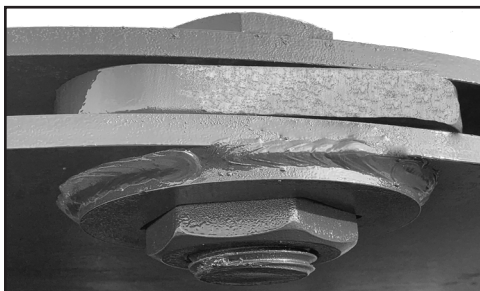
Bolt Head Bead Weld & Assembly
